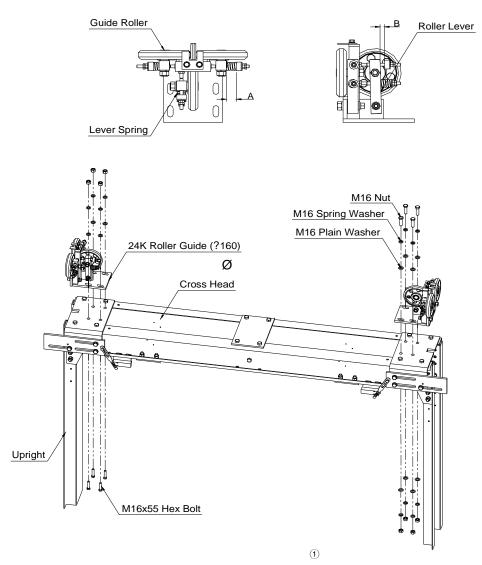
TOP GUIDE ROLLER INSTALLATION (Underslung Skewed type)
